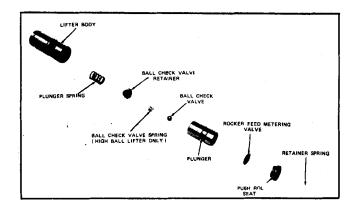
Hydraulic Valve Lifter - Exploded View
